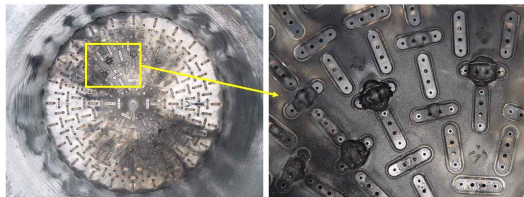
Damage on Injector Face Plate of Combustion Chamber
